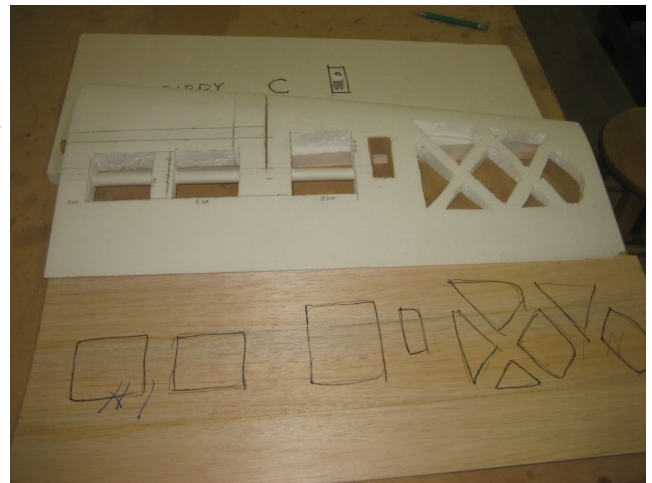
(left below) shows the core after I have drilled my wing tube holes. If you don't use tubes you can omit this step but then you could take more foam out of this heaviest portion of the core where the tube would have been. Core "C" lost a net 6 grams after installing the cardboard wing tube and honeycombing the tip, I didn't weigh the tube. The cores were all marked at the same time so I could be consistent on the 2 sets. We'll mark it some more as you will see in the core lightening process.
